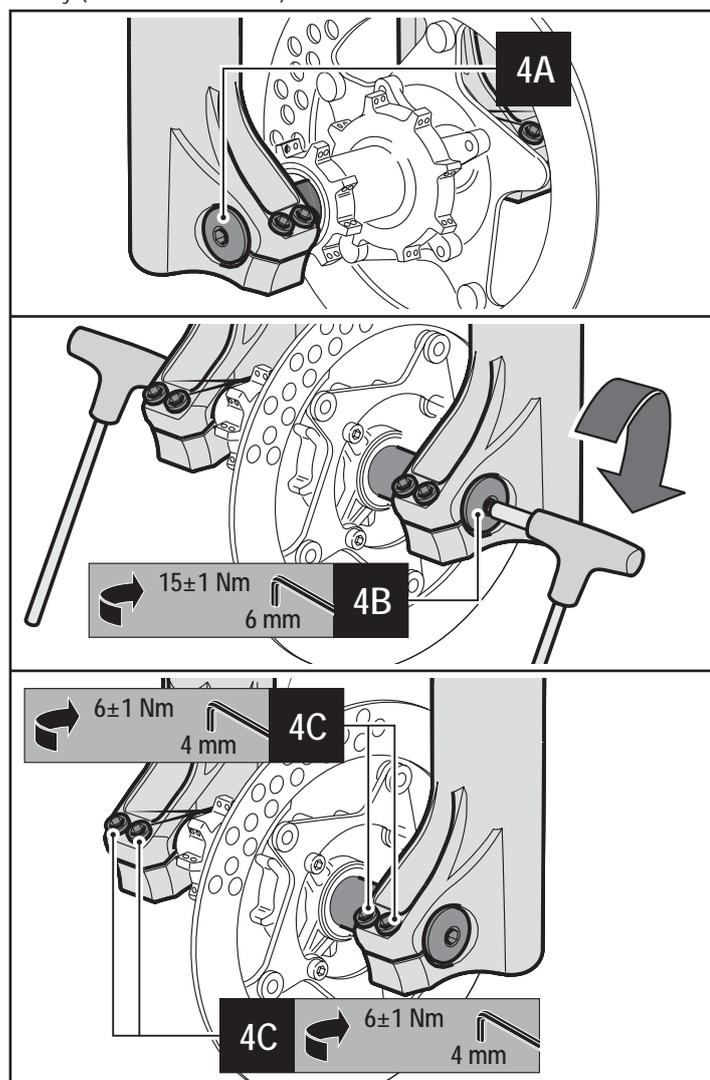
Wheel install on ø32 fork with a 20mm diameter through-hole axle
